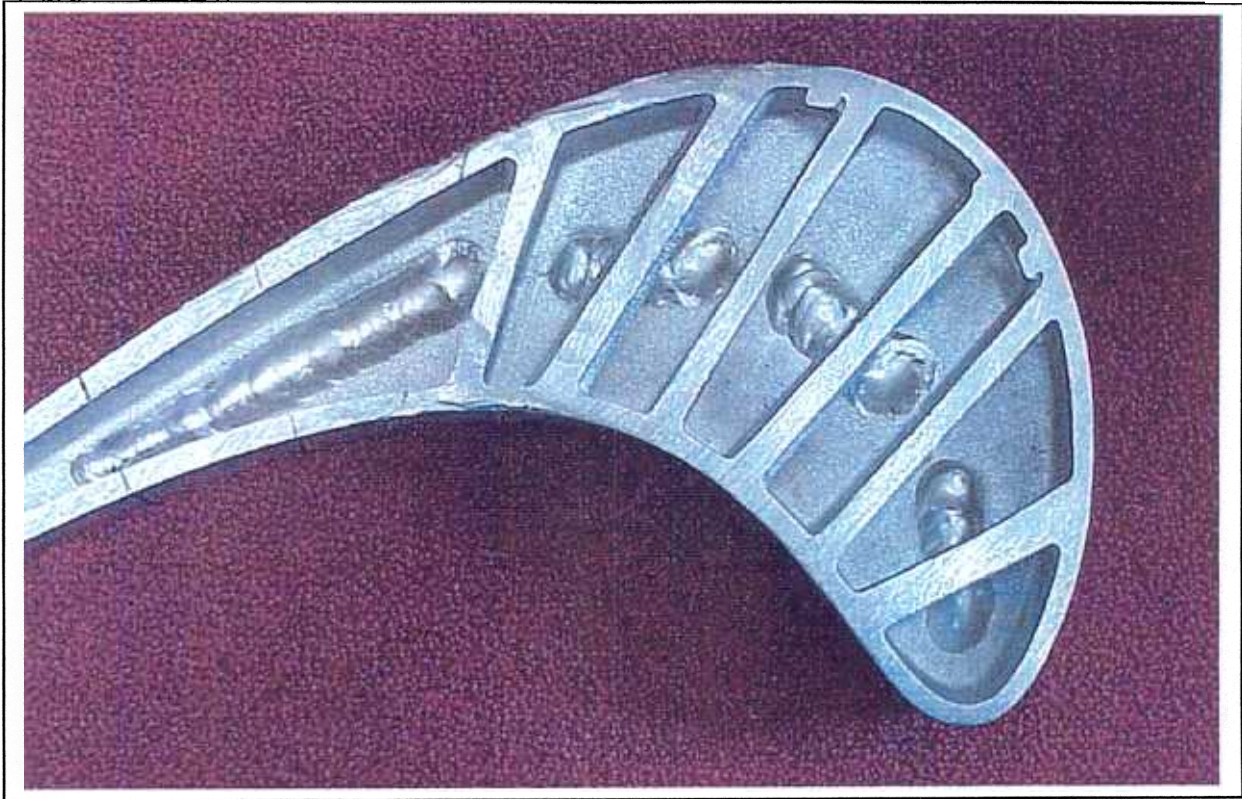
Tip Hole Closure Using GE Proprietary Welding Technology
